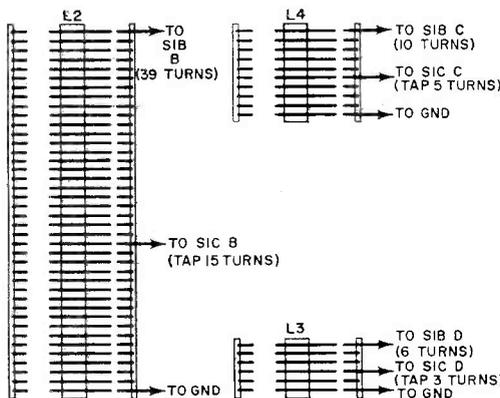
Coil L1 is installed by inserting clips near screw end into mounting hole and pressing down on coil until a click is heard. The B & W coils (L2 through L4) must first be cut down to the specified number of turns.
